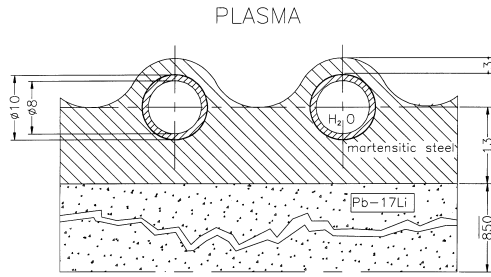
First wall cross section used in calculations. The lengths are in mm.
